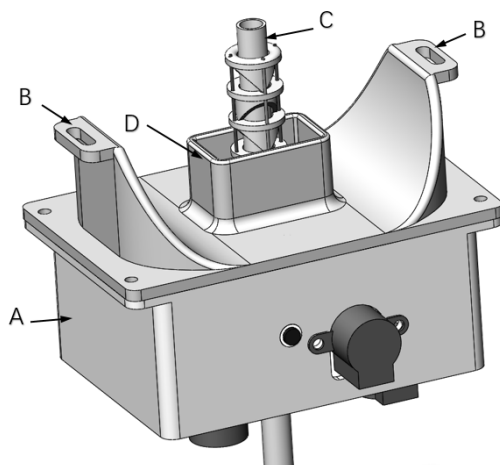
The whole robot. (A) Mechanical transmission parts box. (B) Slotted hole the belt tie to. (C) Endotracheal tube. (D) Rectangular block.
